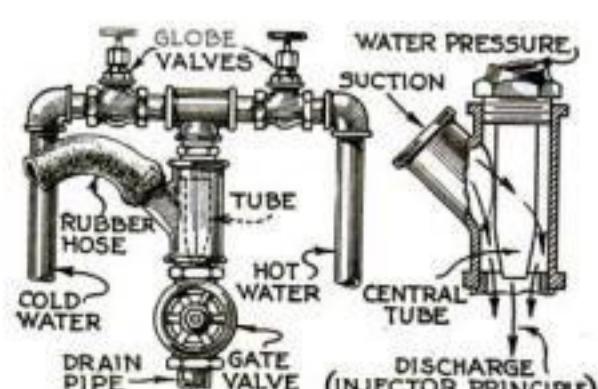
Attachment for emptying a washing machine. The construction is shown at right.
